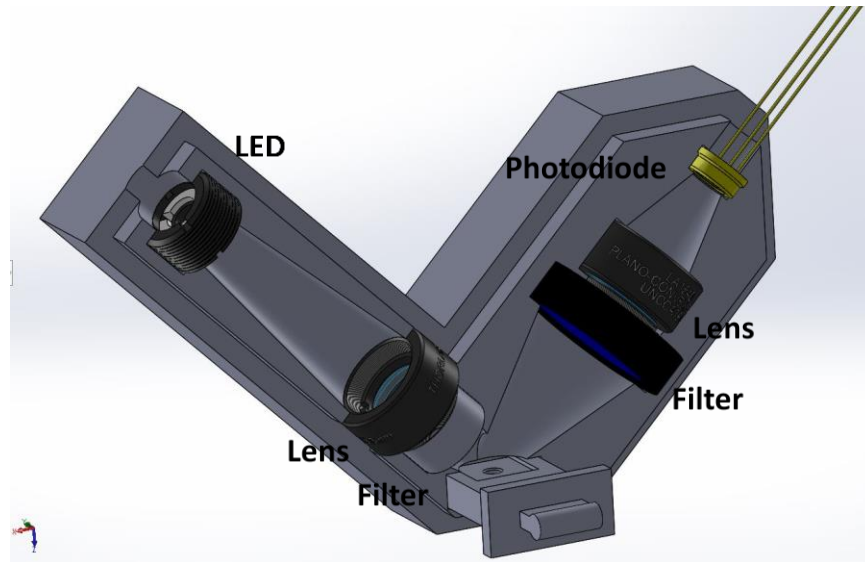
Cross section CAD drawing of Prototype 2 showing the internal optical elements
